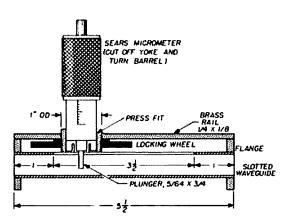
Construction details for the slide screw tuner. All fabricated parts are brass plated with electroless tin, using a simple, one-step process, before soldering together. Note the slot is shown in fig. 4 extending almost to the ends of the guide have been modified in this drawing. This is the recommended construction.
